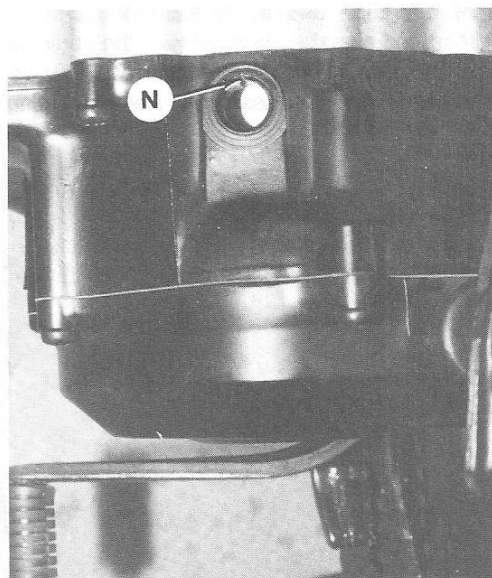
Remove plug (P) to view timing marks on flywheel.
